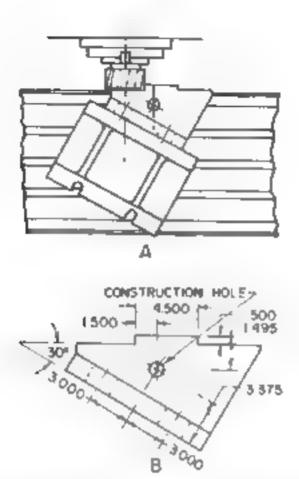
A. Working we set up on angle that to mill angular surface on hir nontaspindle on angunachine. For clarity classification are not shown B. Workpiter to be machined.
